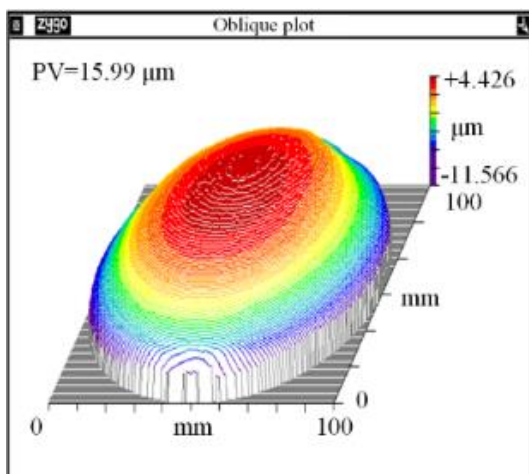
Deformation measurement results of the workpiece after 2 h of machining
